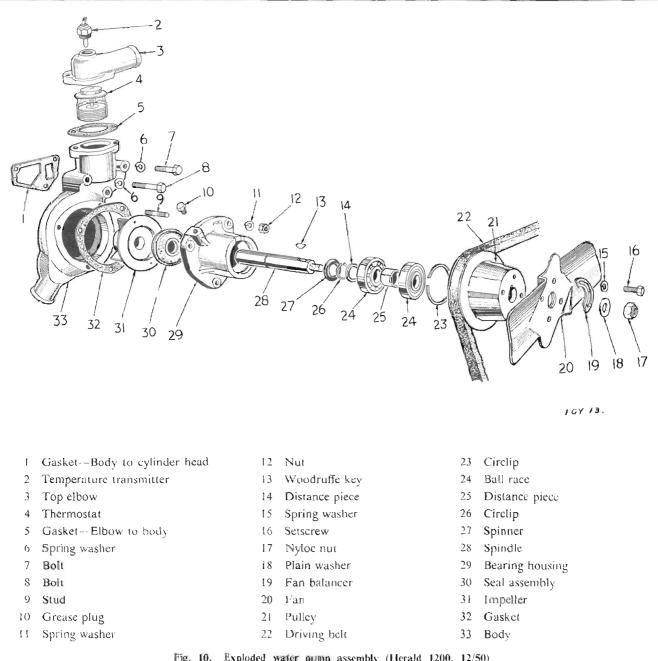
Exploded water pump assembly (Herald 1200, 12/50) Spitfire has 4 fan blades and Vitesse has items 15 to 20 deleted
